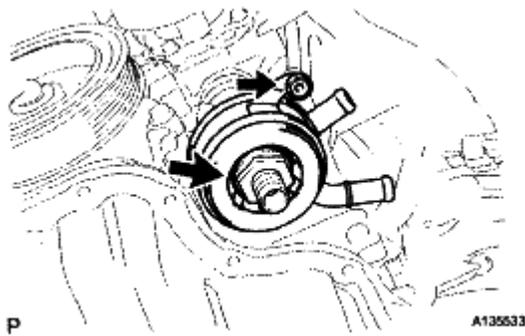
Identifying Oil Cooler Assembly (W/Oil Cooler)
